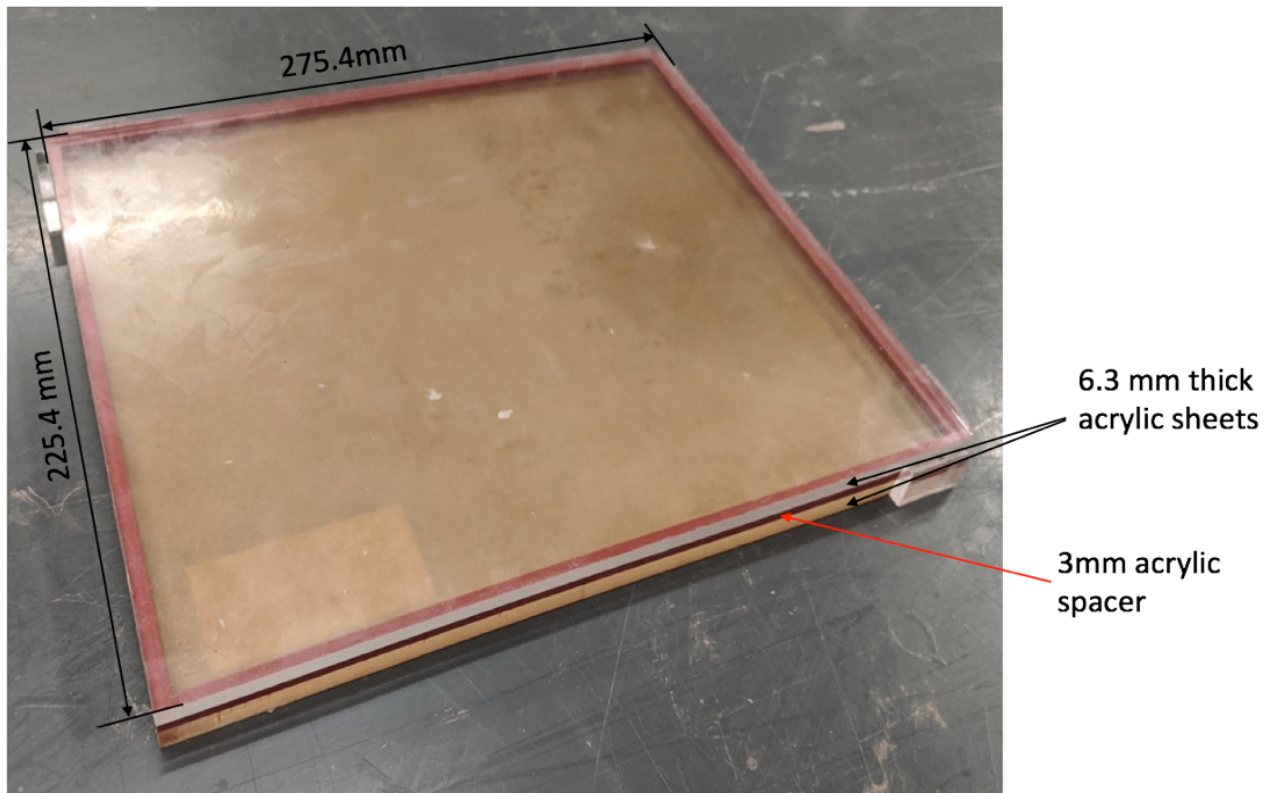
Sheet Mold for Fabricating Silicone Sheets
